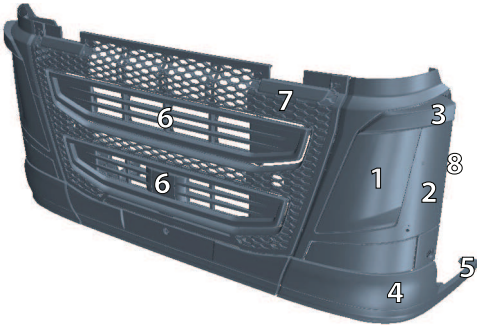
CAD model of complete lower front. 1: Headlamp lens, 2: Headlamp panel, 3: Side turn indicator, 4: Bumper, 5: Spoiler, 6: Foot step, 7: Lower front panel, 8: Gap.
